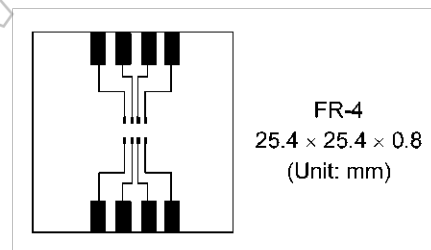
Device Mounted on a Glass-Epoxy Board (b)
